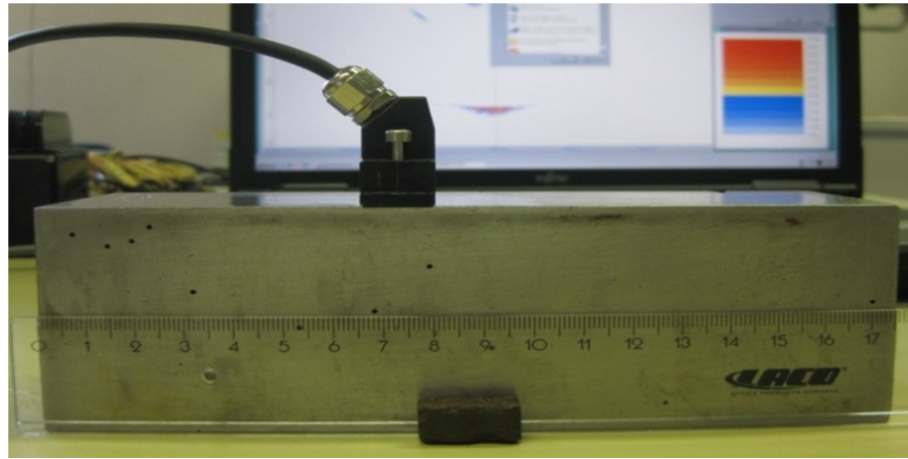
Test specimen with side drilled holes and fatigue crack.
